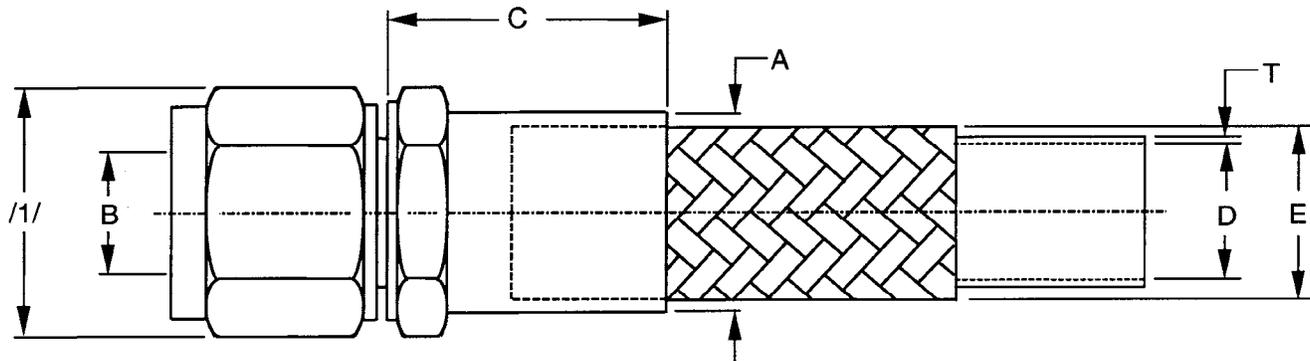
HOSE AND FITTING DIMENSIONS
